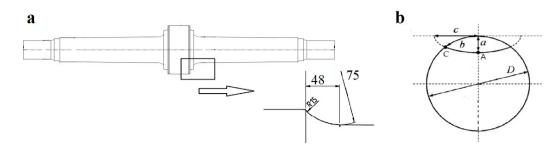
geometry of the axle: a) dimensions at the T-notch b) crack configuration
